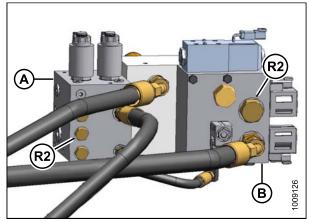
Valve Blocks with Reverser Valve in Factory Configuration
